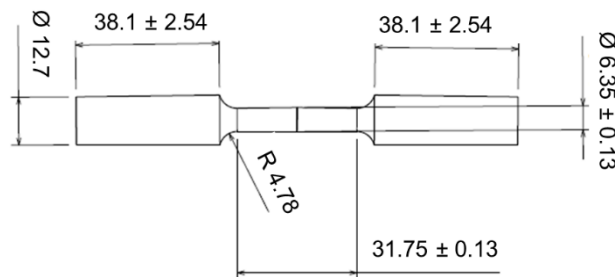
Tensile test specimen. Dimensions are given in millimeters.
